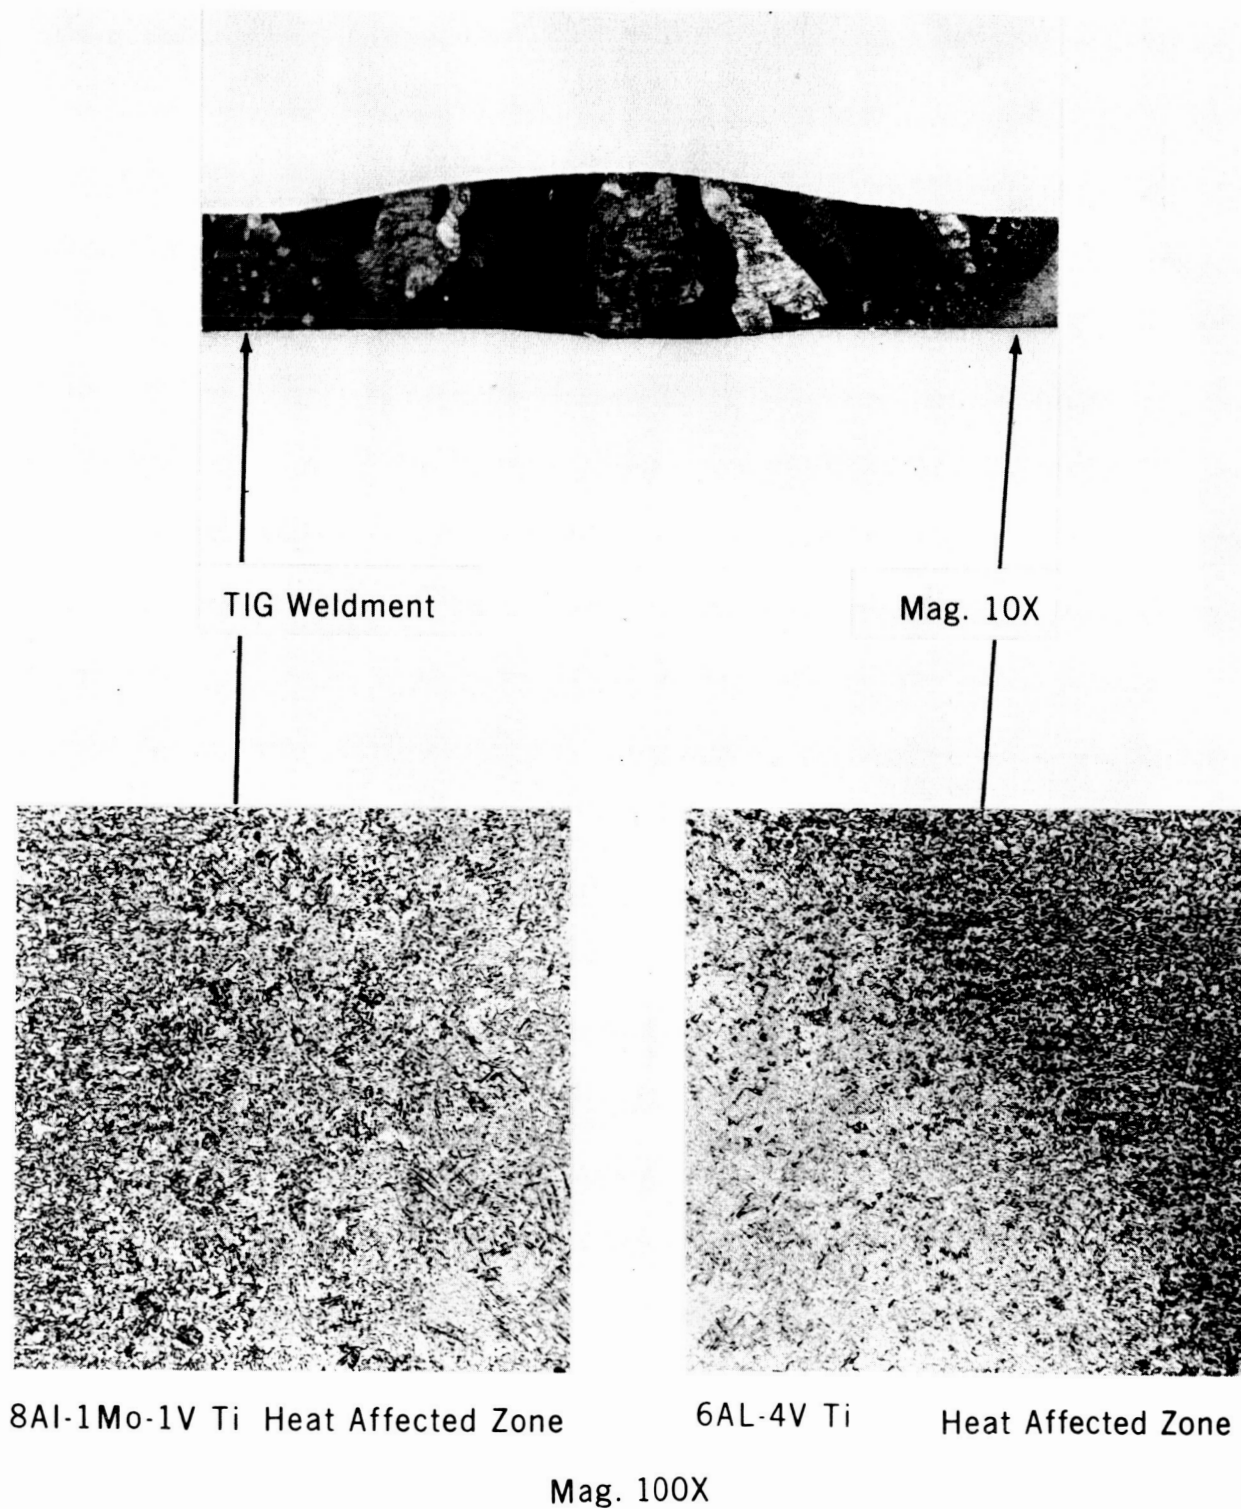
STRUCTURE OF TIG WELDMENT
